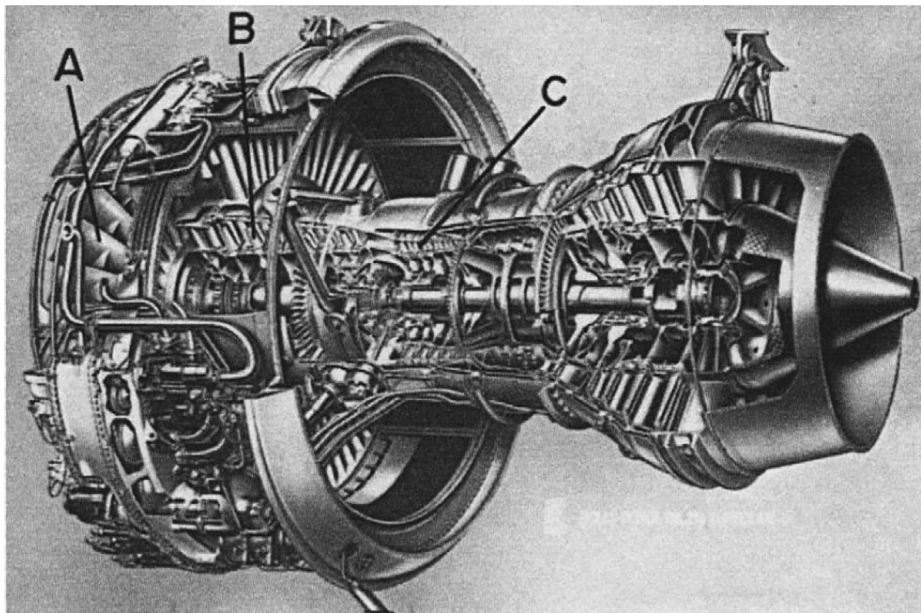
Sectional view of one model of the Rolls Royce RB 211 gas-turbine engine. A, fan blades; B, lower-pressure compressor; C, intermediate pressure compressor [7].
